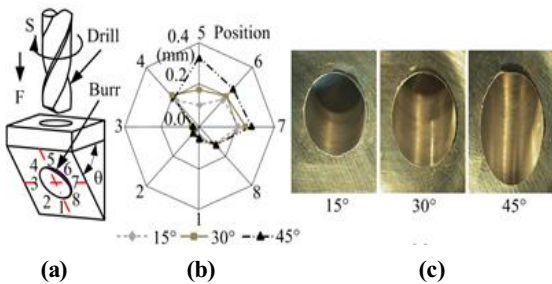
Burr formation on inclined exit surface (a) schematics of drilling operation (b) height of burrs on the workpiece with different exit surface inclination angle (c) burr examples formed before deburring
